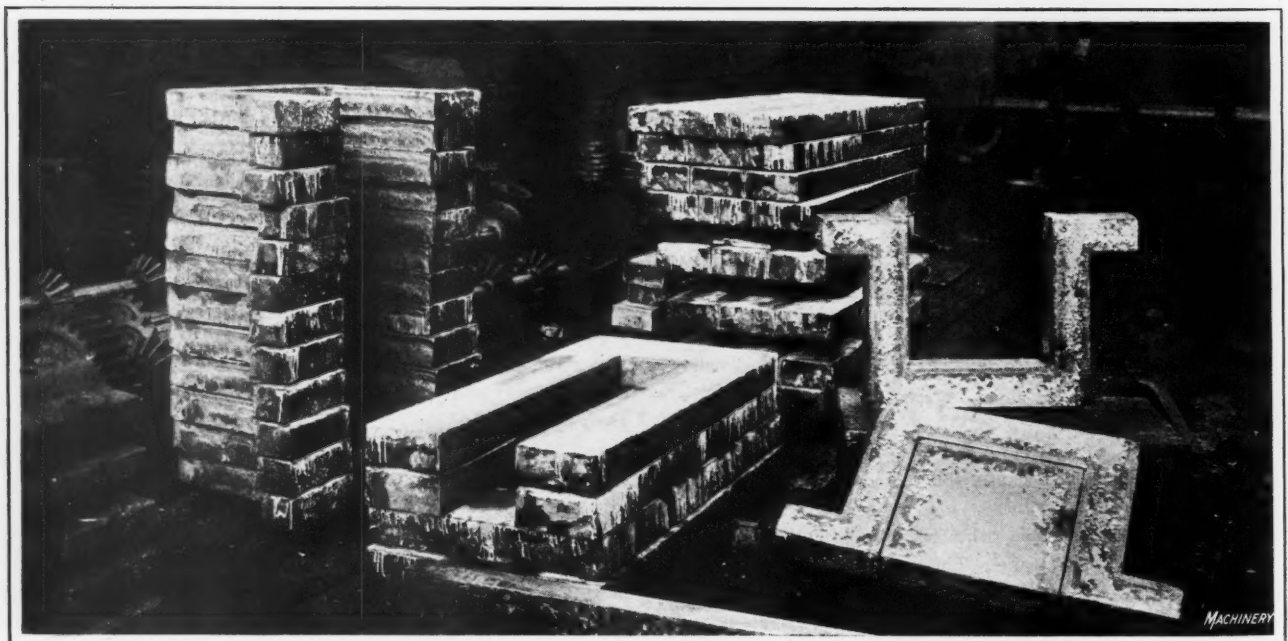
File of Roll Housings cut from Steel Slabs by the Use of the Machine shown in Fig. 1
